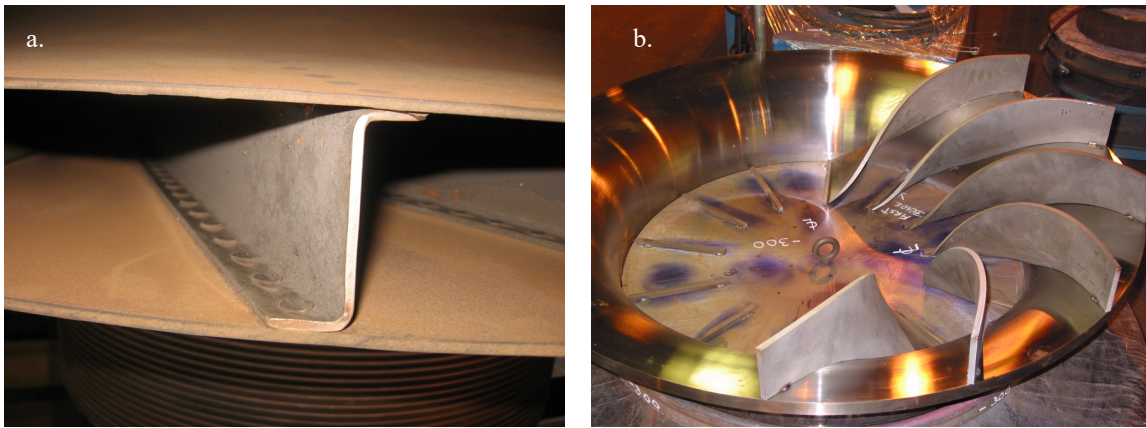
An example of three piece impellers, including a riveted impeller (a.) and a welded impeller being fit (b.)
